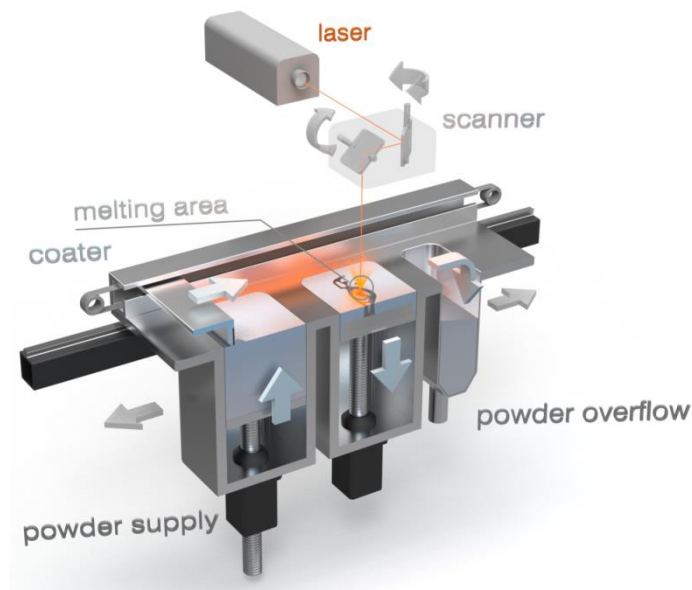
Schematic view of a Concept Laser machine [Concept Laser].
